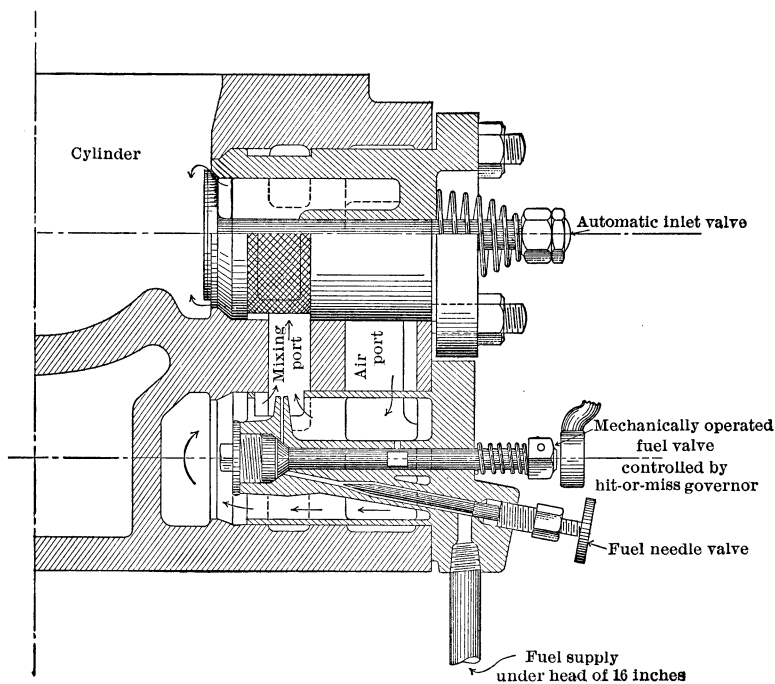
Horizontal section through carburetor and inlet valve of Otto gasoline engine.
